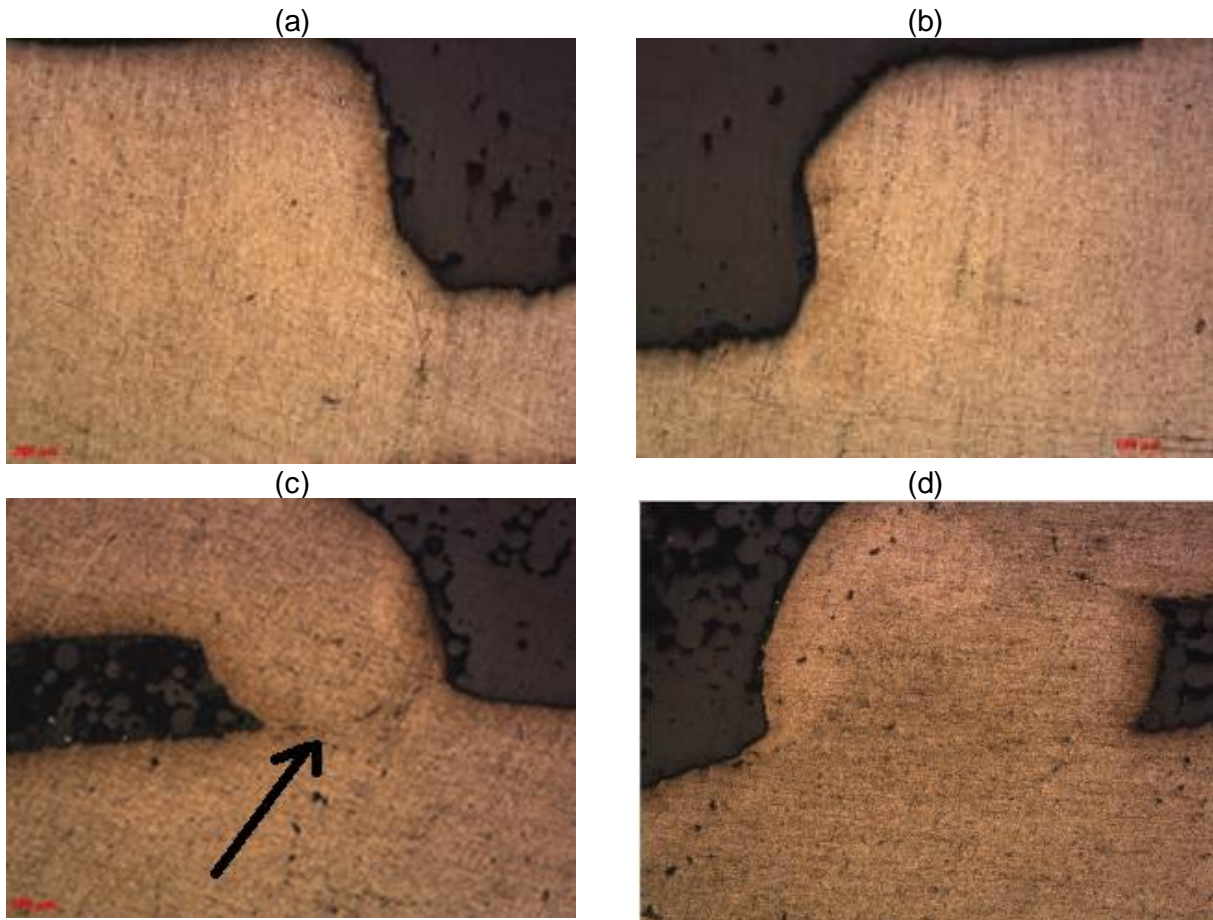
Microscopic images of welds (a) Left side of weld 19 (b) Right side of weld 19 (c) left side of weld 11 (d) right side of weld 11
